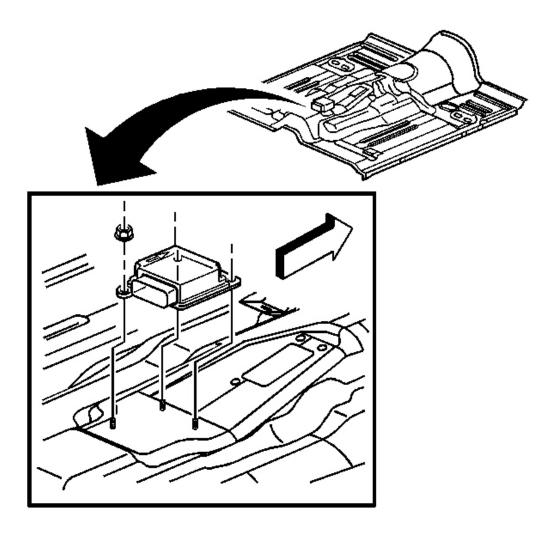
View Of SDM Retaining Nuts Courtesy of GENERAL MOTORS CORP.
